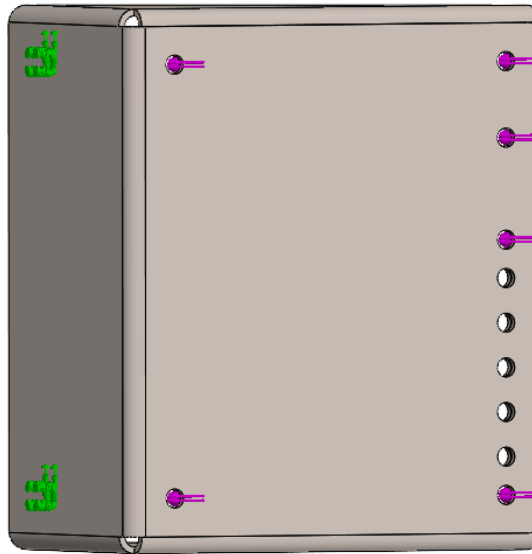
BRACKET 3 FIXTURES AND LOADING CONDITIONS.
